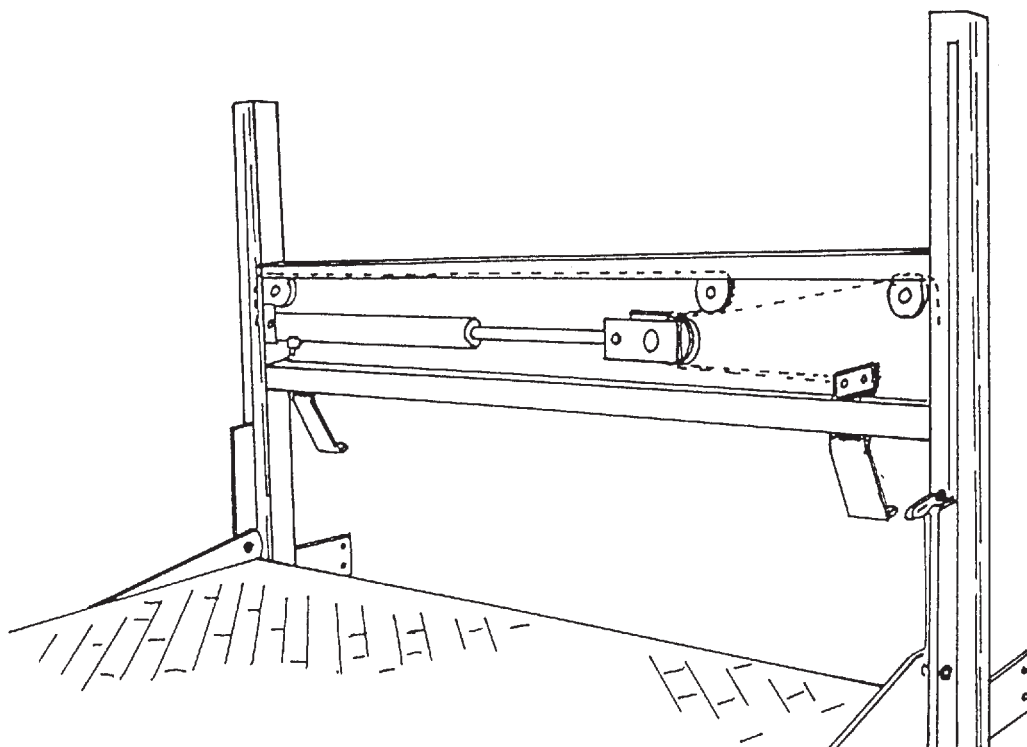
OVERALL VIEW WITH COVER REMOVED
